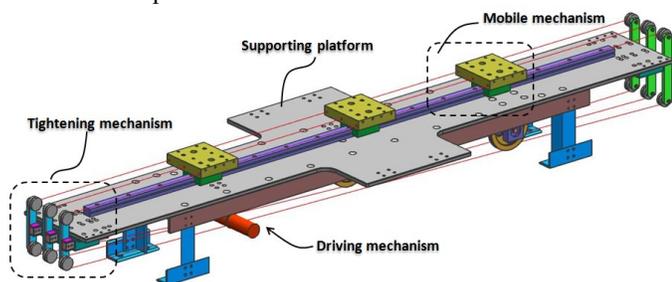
Linear motion platform, including supporting platform, mobile mechanism, tightening mechanism and driving mechanism.
